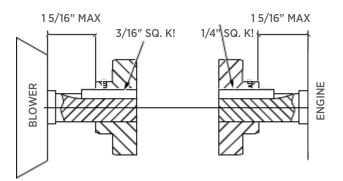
COUPLING ASSEMBLY SCHEMATIC
